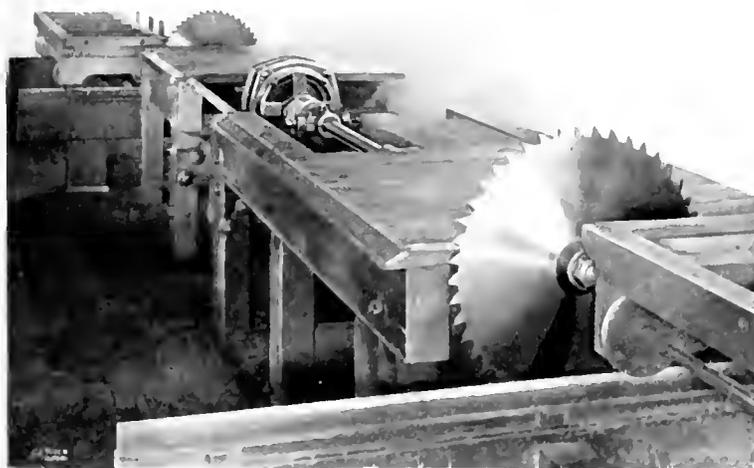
7 1/2 H.P. Induction Motor Direct Coupled to Two 20 in. Circular Cross Cut Saws
